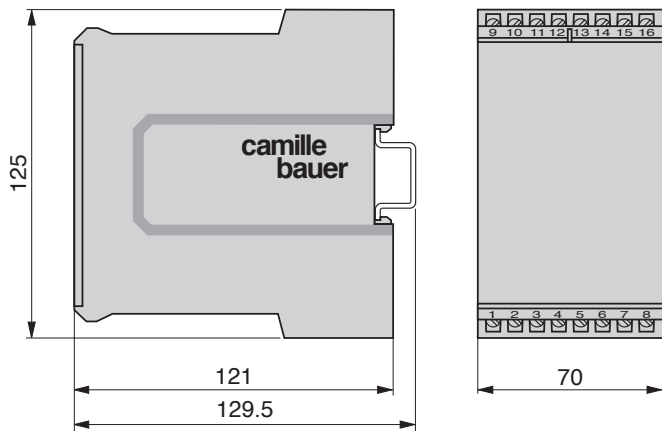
Housing type E16 clipped onto a top-hat rail EN 50 022, 35 x 15 mm or 35 x 7.5 mm.
